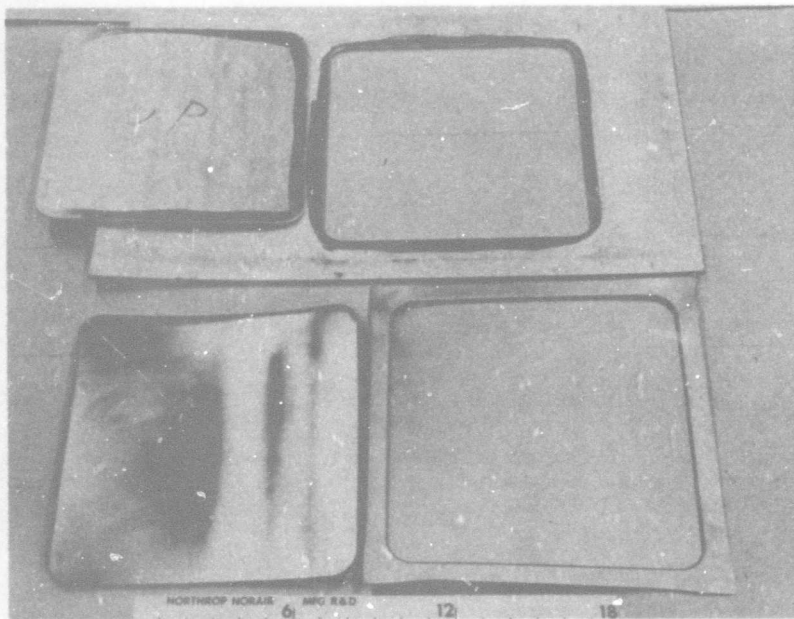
ROLL FORM DIE WITH FORMED FLAT AND CURVED .008 INCH T111 OUTER HEAT SHIELD PANEL SKINS
